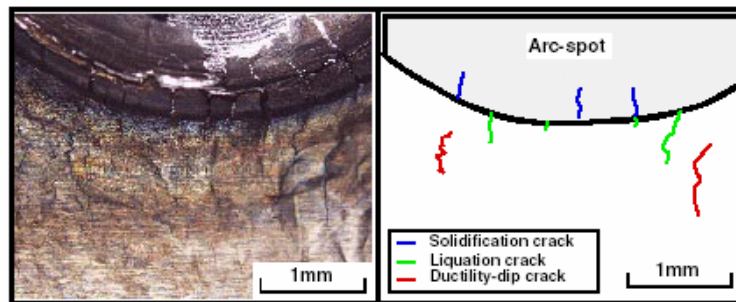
Macro- and schematic pictures of the cracks in spot-Varestraint testing using La-added weld metal (Nishimoto et al. 2004).
